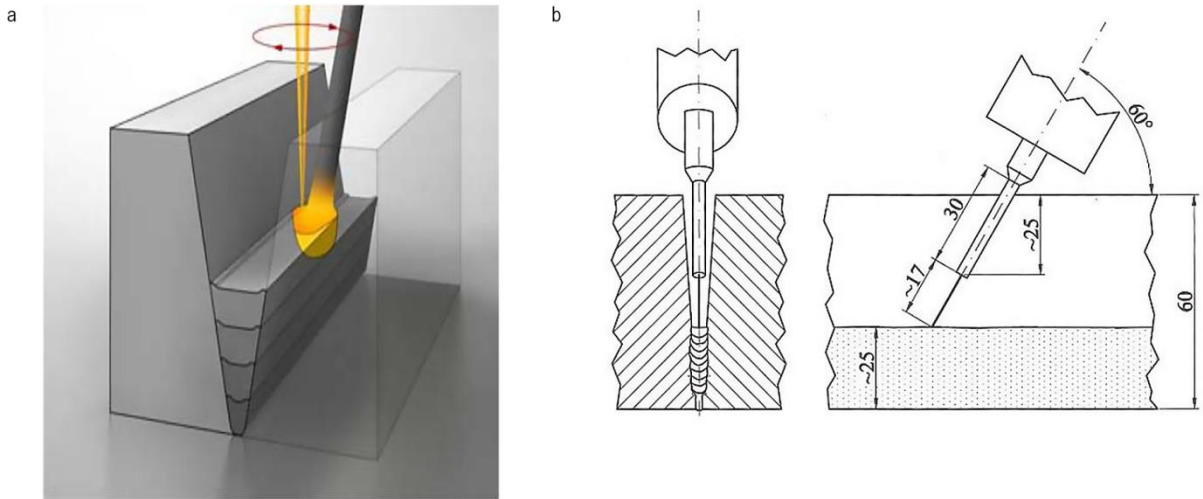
(a) Multi-layer laser-wire welding with scanned laser beam, Schedewy et al. (2013); (b) specialized wire guidance nozzle, Karhu and Kujanpää (2015)
